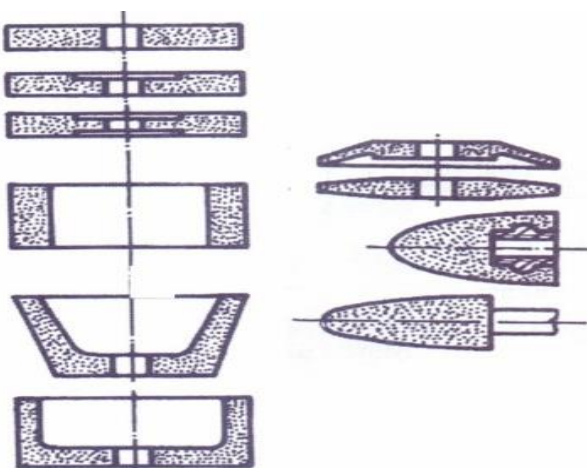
Examples of wheel, pot, plate and spindle grinding tools
